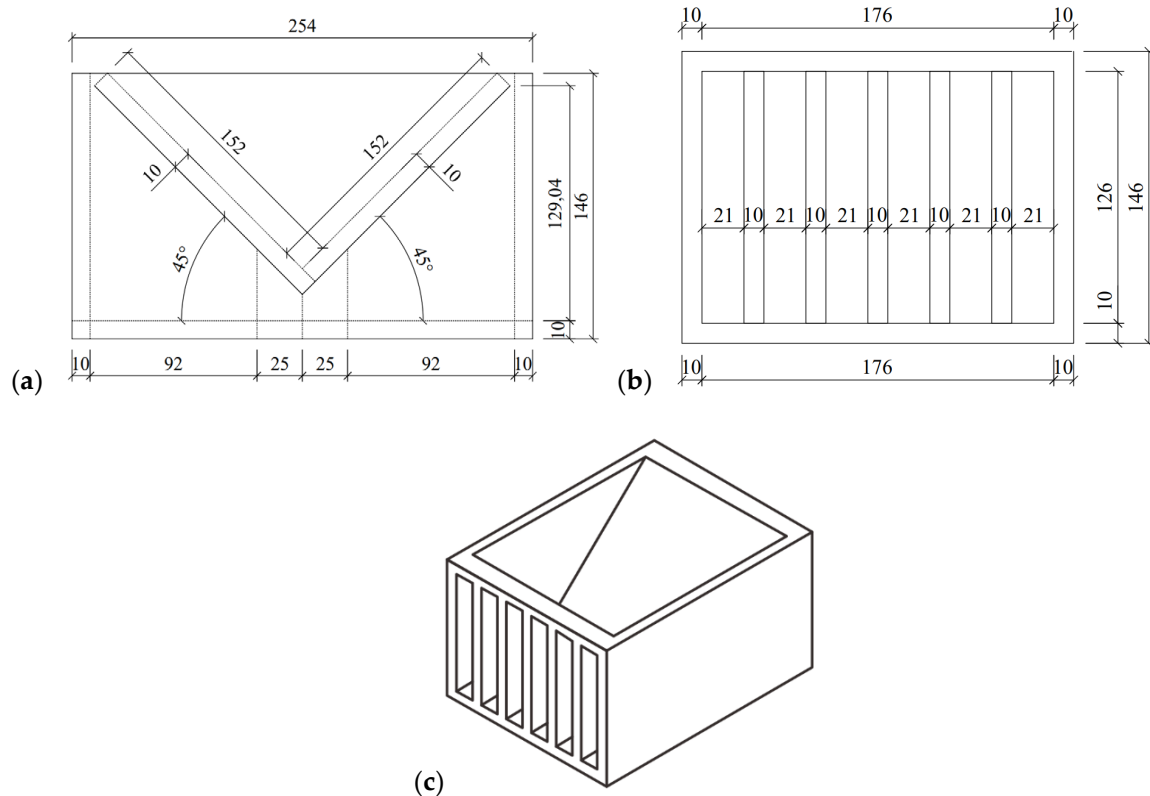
Loading support for the diagonal compressive test: (a) Cross Section view; (b) Bottom view; (c) Isometric view. Units are in mm.
